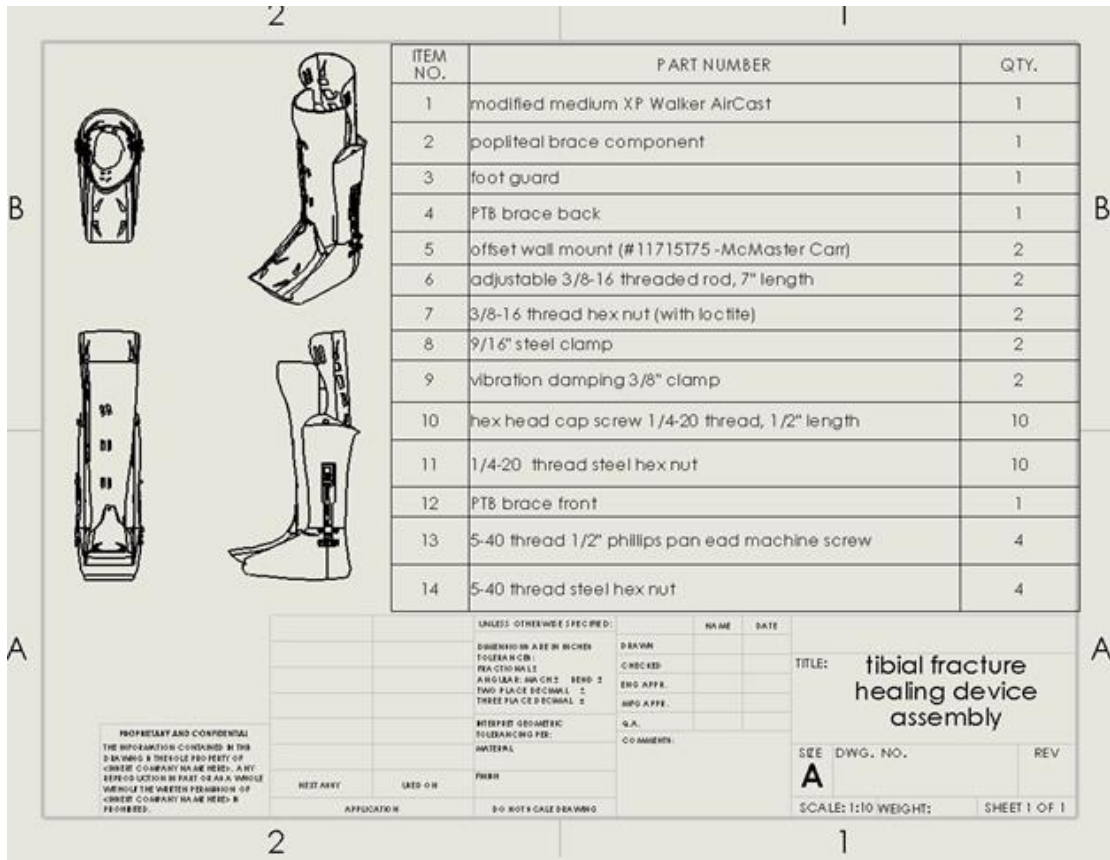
Engineering drawing of the final design, accompanied by the bill of materials
